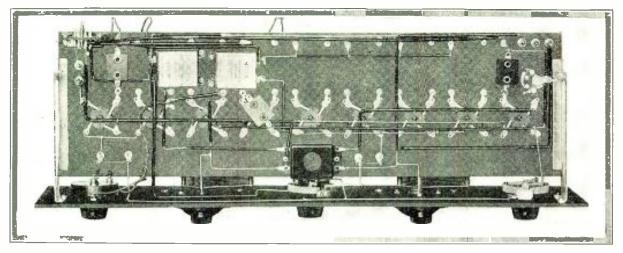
Photo D. Bottom view showing arrangement of parts on bottom of subpanel
